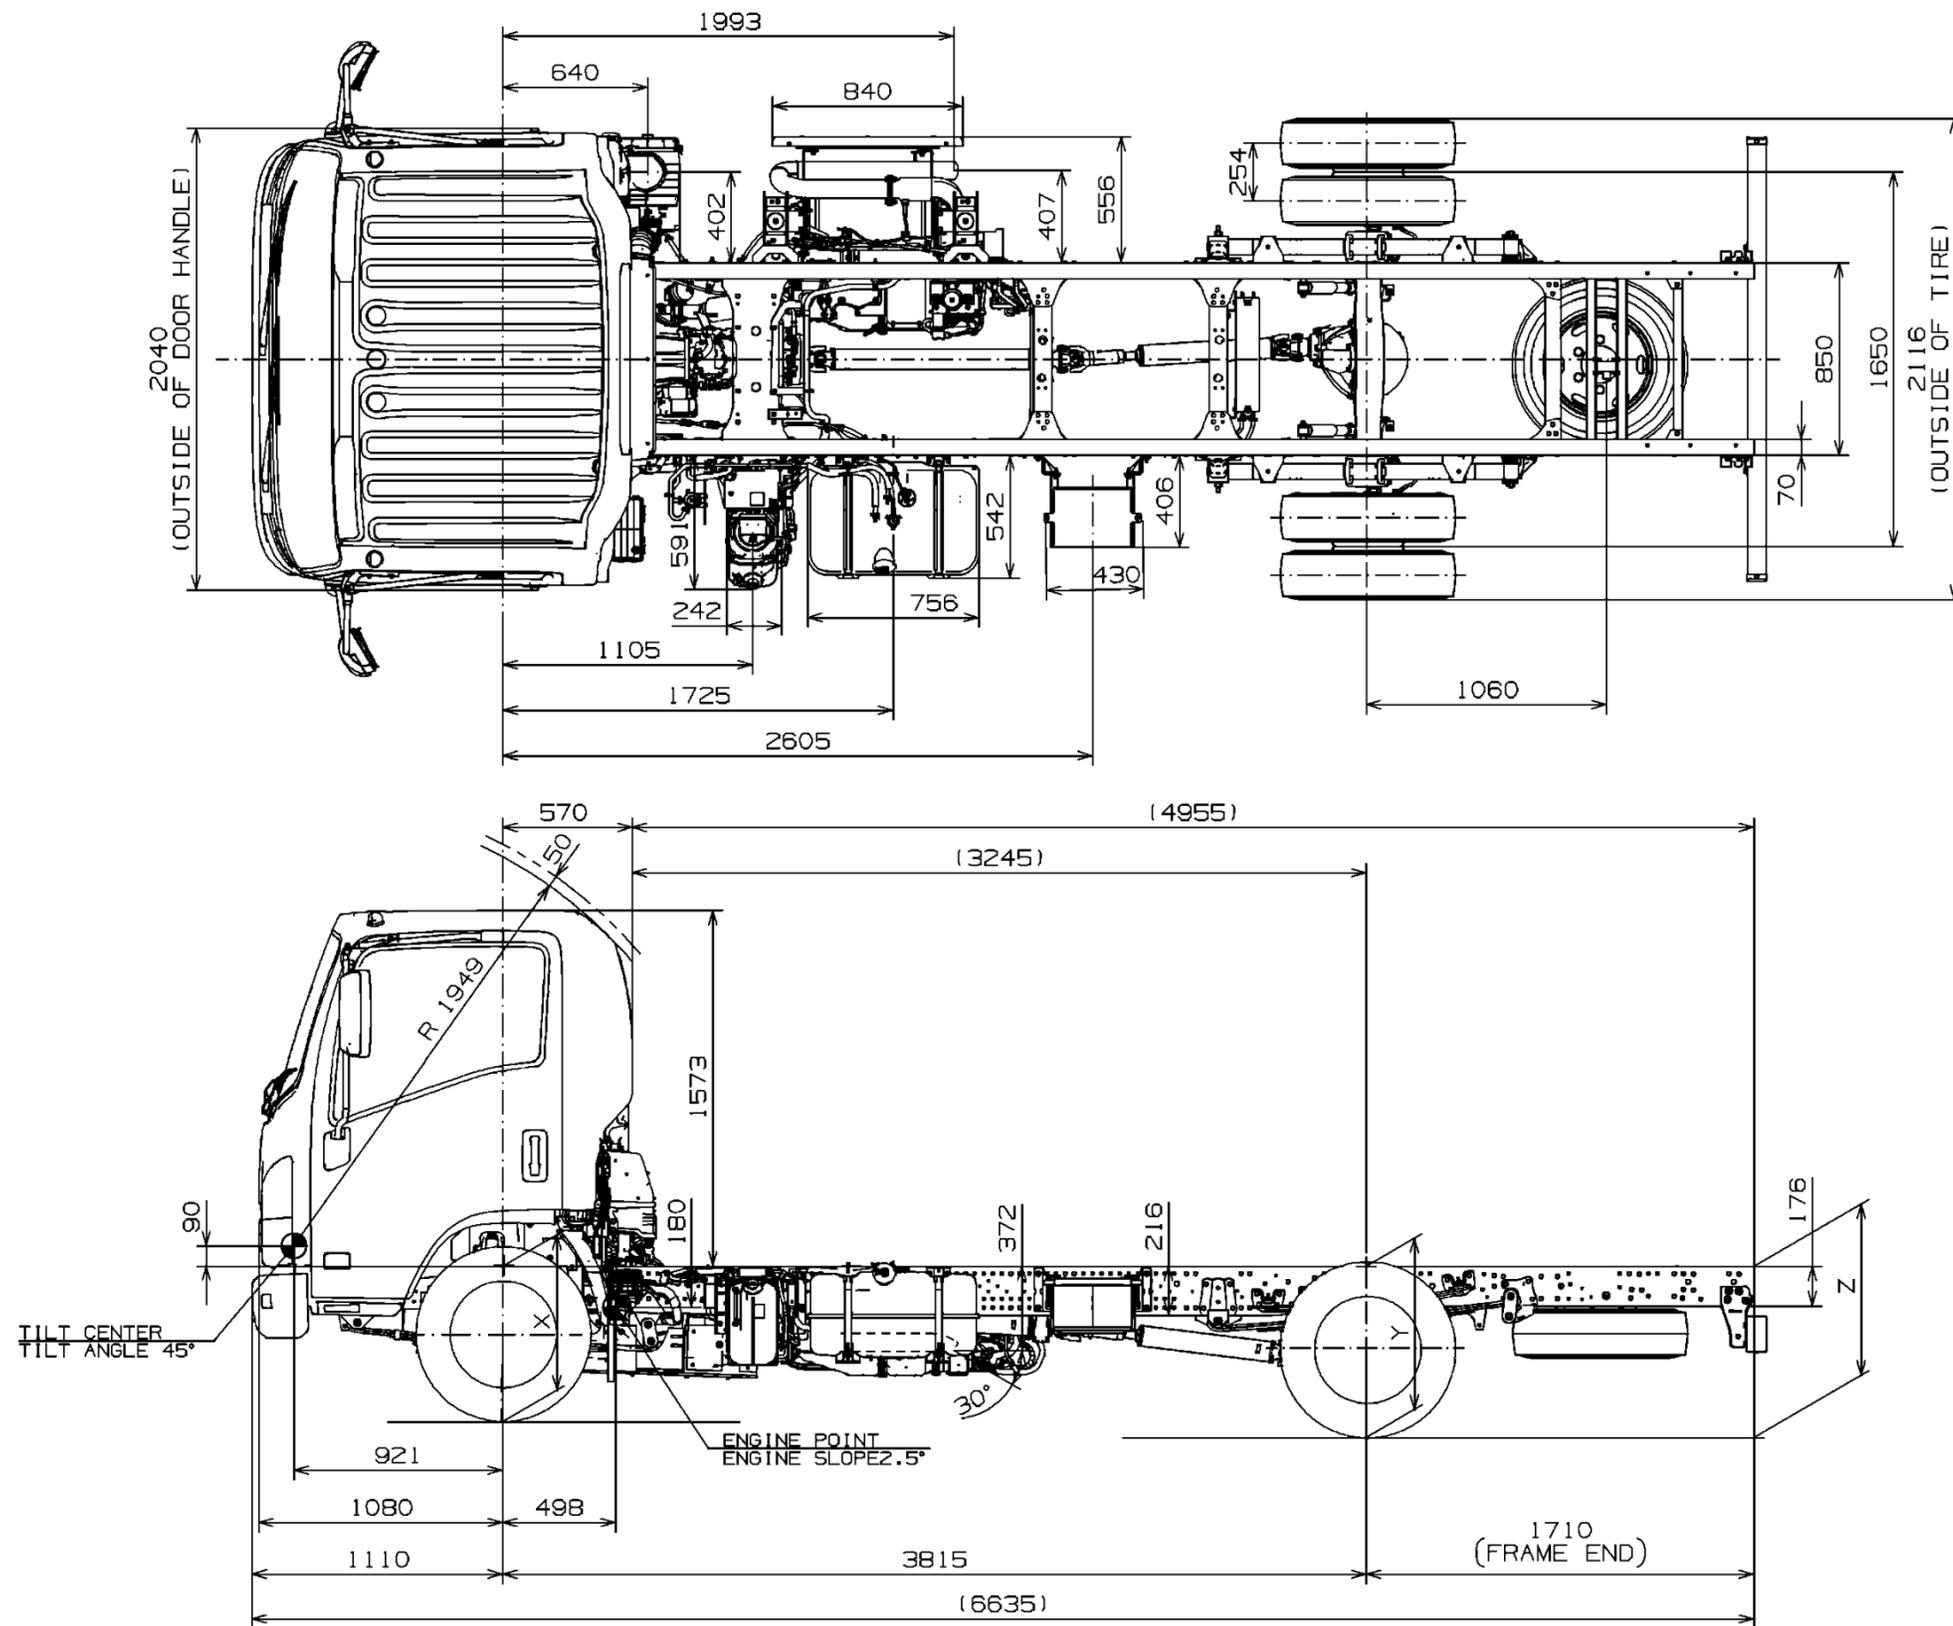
Cab Chassis Drawing NPR75L/U-ML5VAYE
